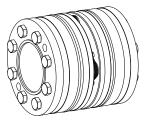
RADEX[®]-NC HT clamping ring hub type EK (hub type 6.5)
